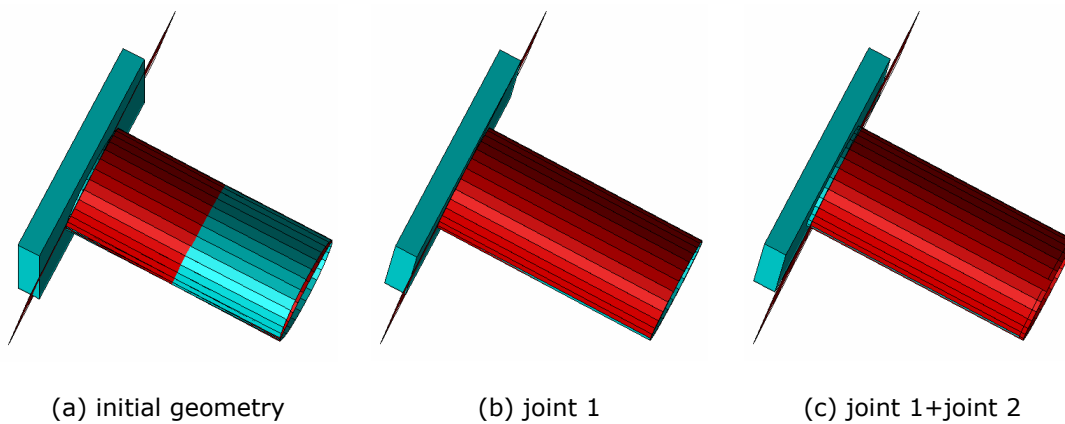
fit and mate joints. Assembly geometry configurations.
